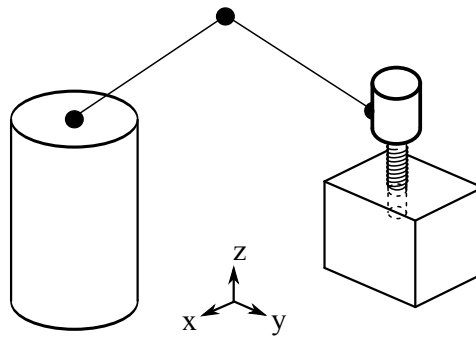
Example task: a robot performing a screwing operation with a dedicated tool.
